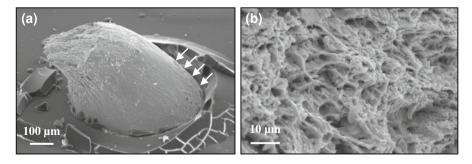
SE detector images of a SAC 405 solder joint that was tested in impact at room temperature. a The solder joint failed in a ductile manner, showing appreciable plastic deformation and necking. b The fracture surface of the solder joint is characterised by numerous dimples related to the presence of IMCs in the solder. Data from imec
